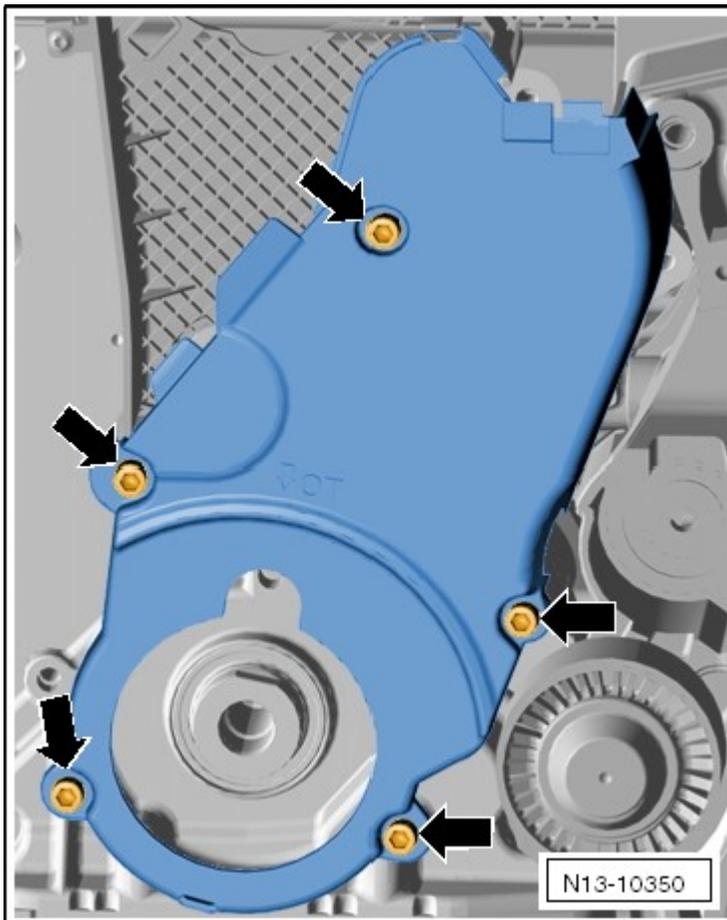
Identifying Lower Toothed Belt Guard And Bolts -Arrows-
